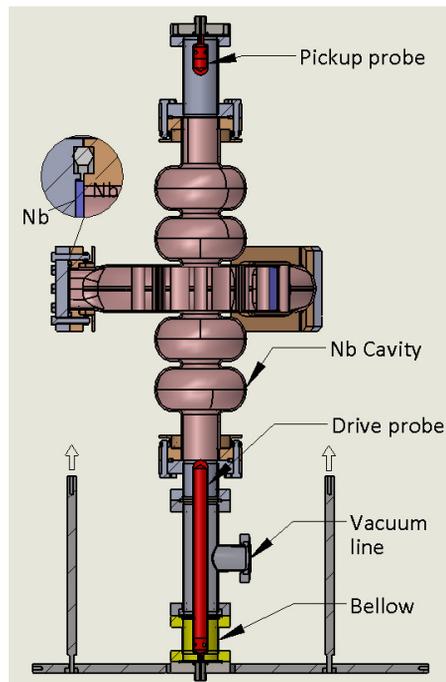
Cross section of the 5-cell module with the pickup assembly and the drive assembly.
